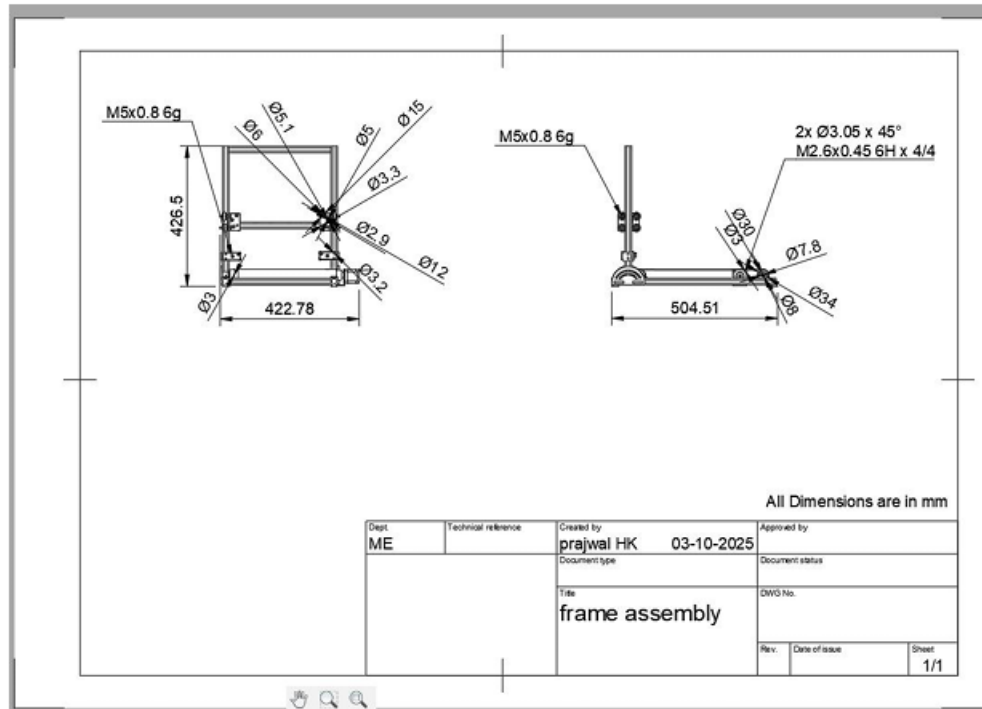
2D engineering drawing of the frame assembly with dimensional specifications
